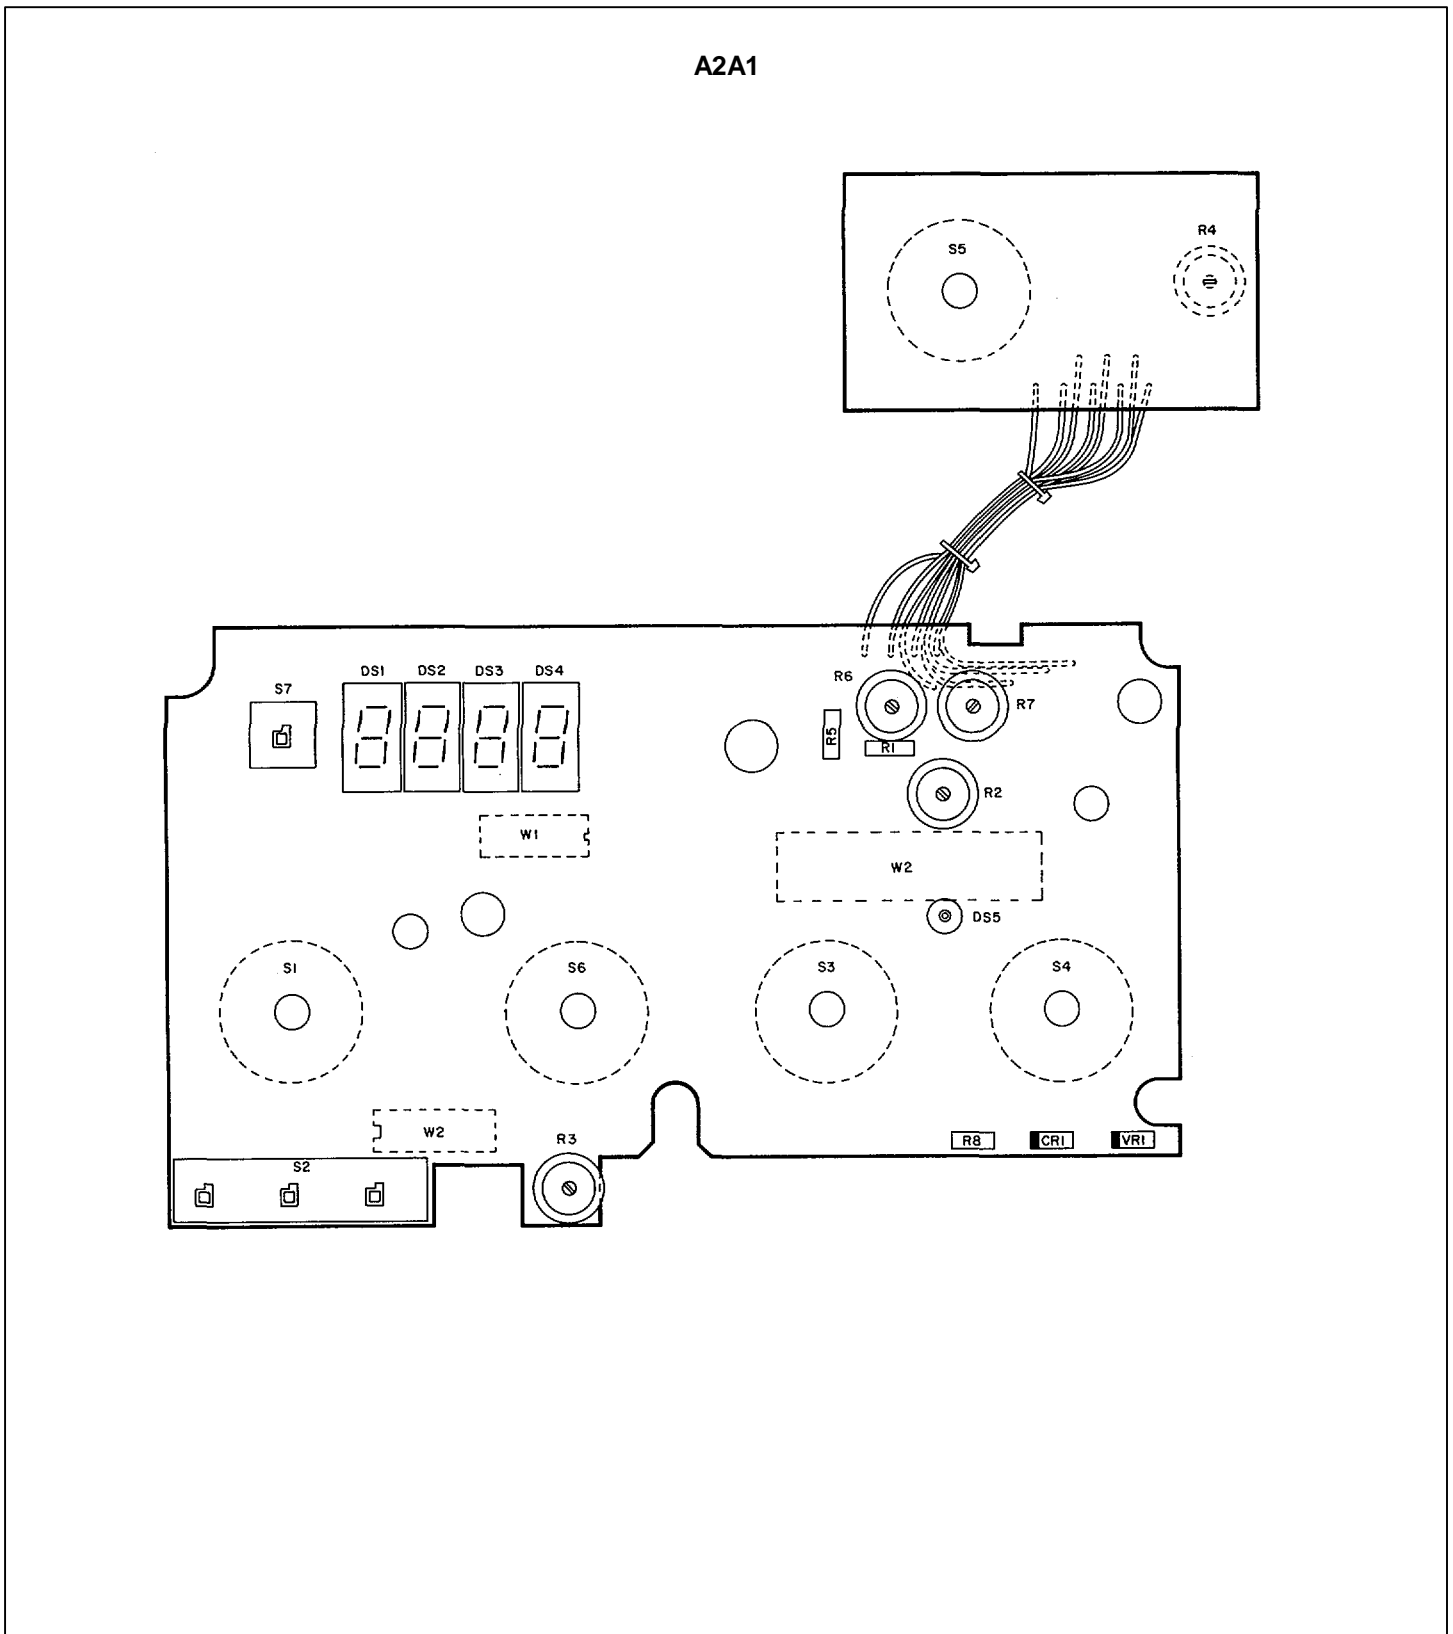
Front Switch Board Assembly A2A1, Component Locations
